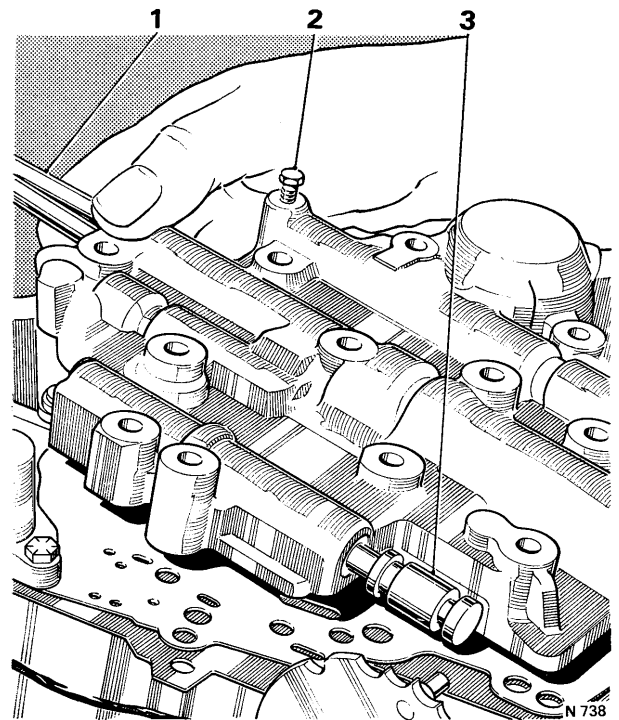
REMOVING THE CONTROL VALVE UNIT
